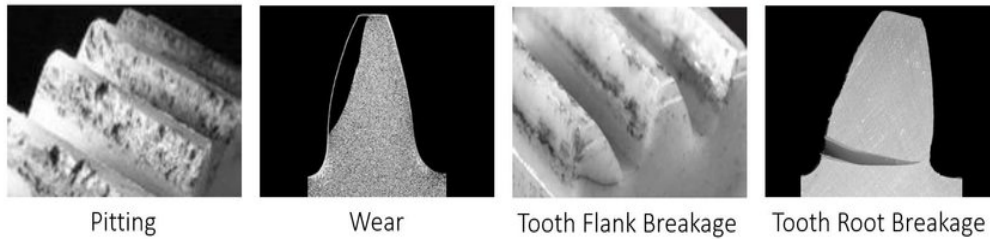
Typical surface gear failure examples – pitting (left) and tooth root breakage (right)
